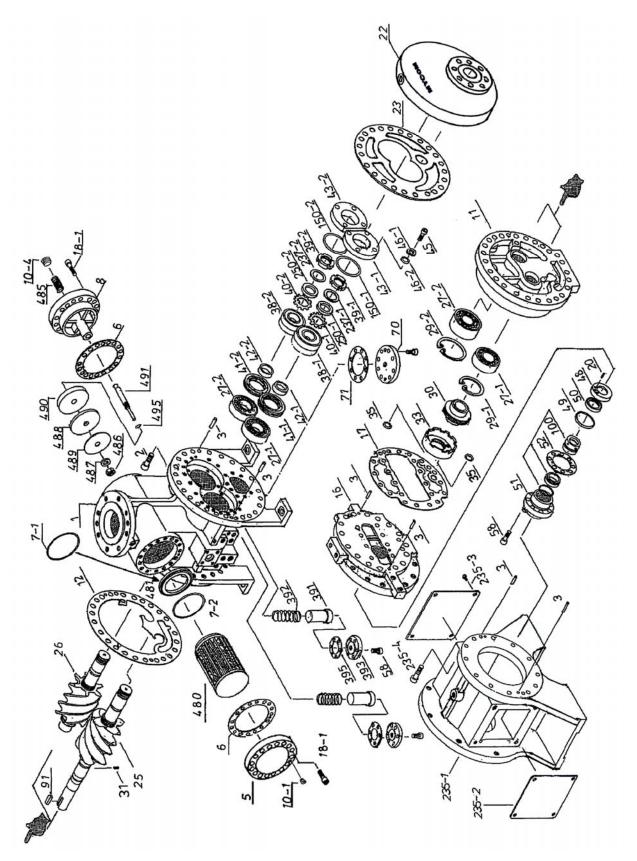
Development View of i160S/L Parts with Motor Spacer
